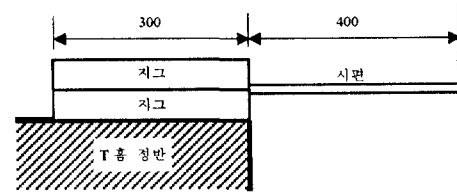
Setup of cantilevered beam specimen (units : mm)
